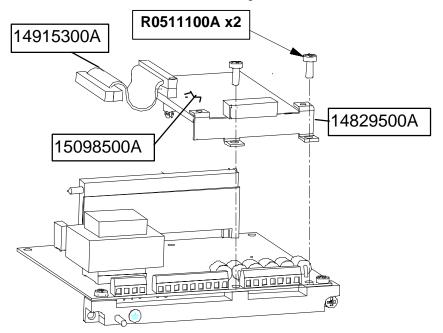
Allen-Bradley PCB Installation in Panel Mount Enclosure
